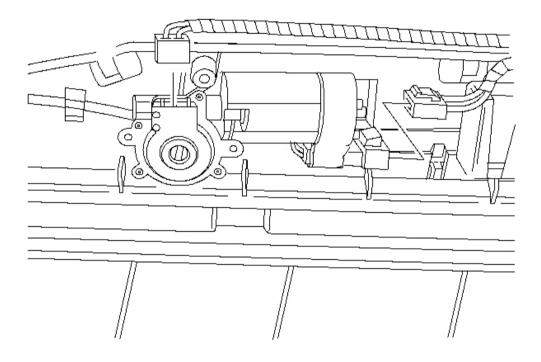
View Of Sunroof Motor/Actuator Courtesy of GENERAL MOTORS CORP.
